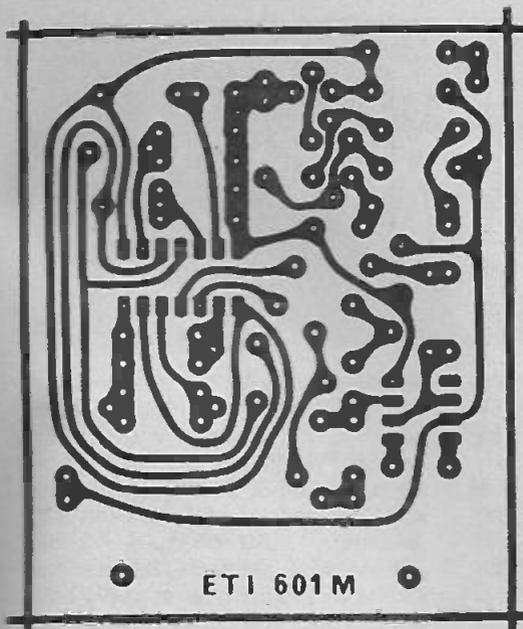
Printed circuit pattern for keyboard-controller modification.
